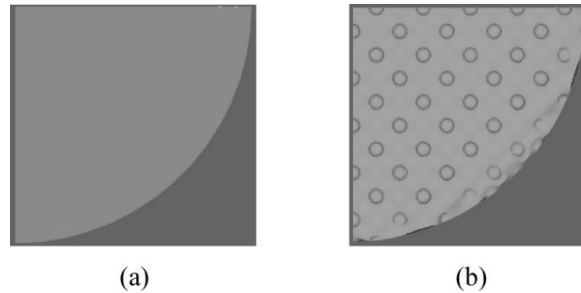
1/4 specimen model (a) Plane sheet (b) Duplex embossed sheet
